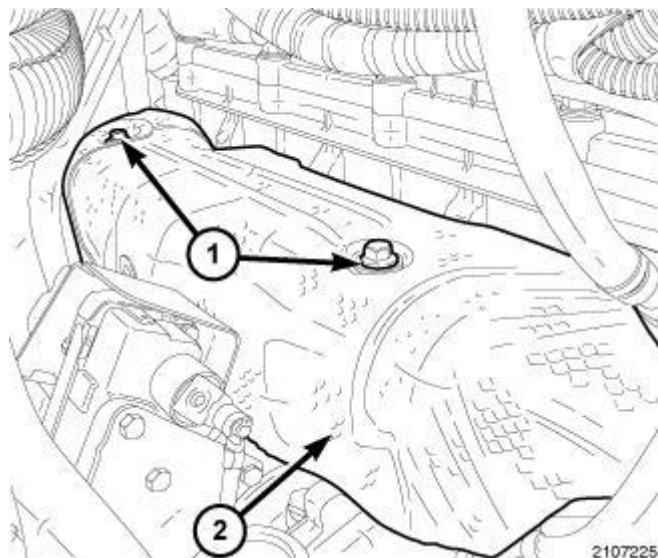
Exhaust Manifold Heat Shield & Bolts
